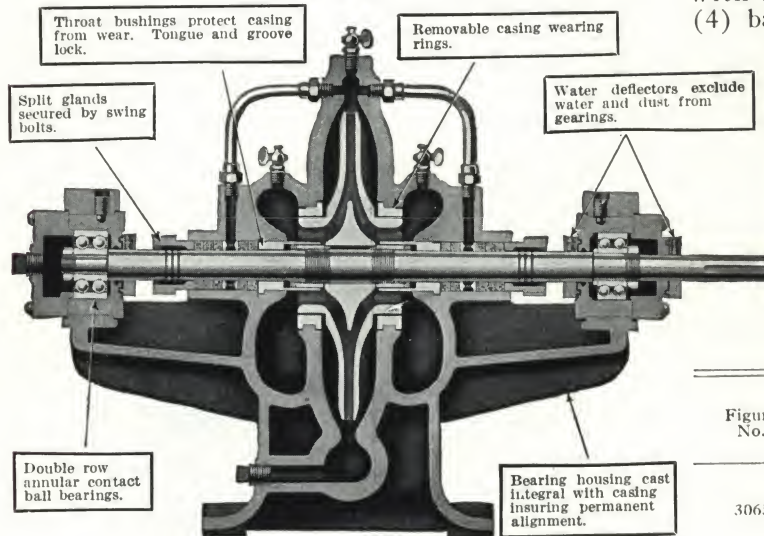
Sectional View of Single-stage, Ball Bearing Centrifugal Pump
